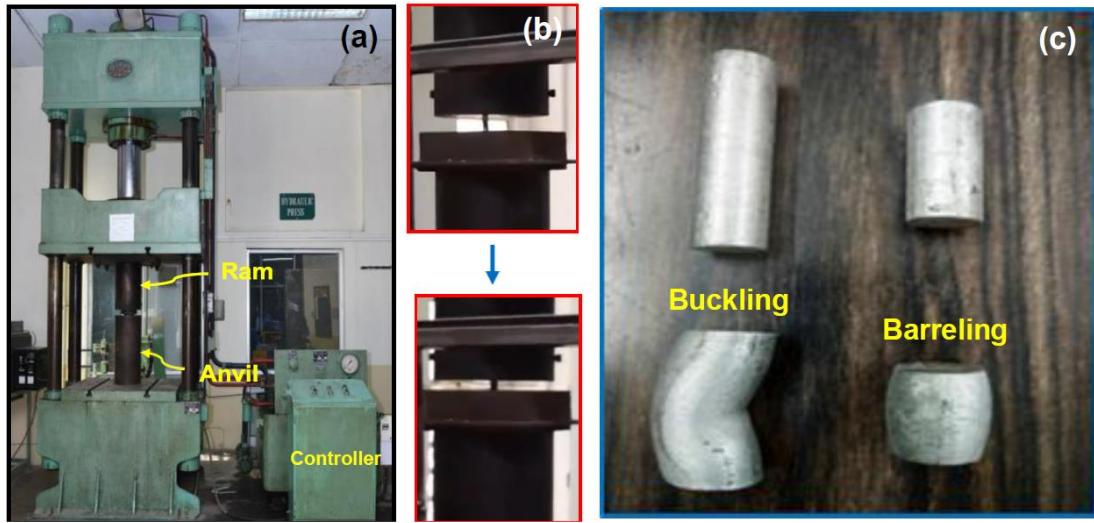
(a) Forging machine, (b) Forging of cylinder, and (c) Buckling and barreling during forging
